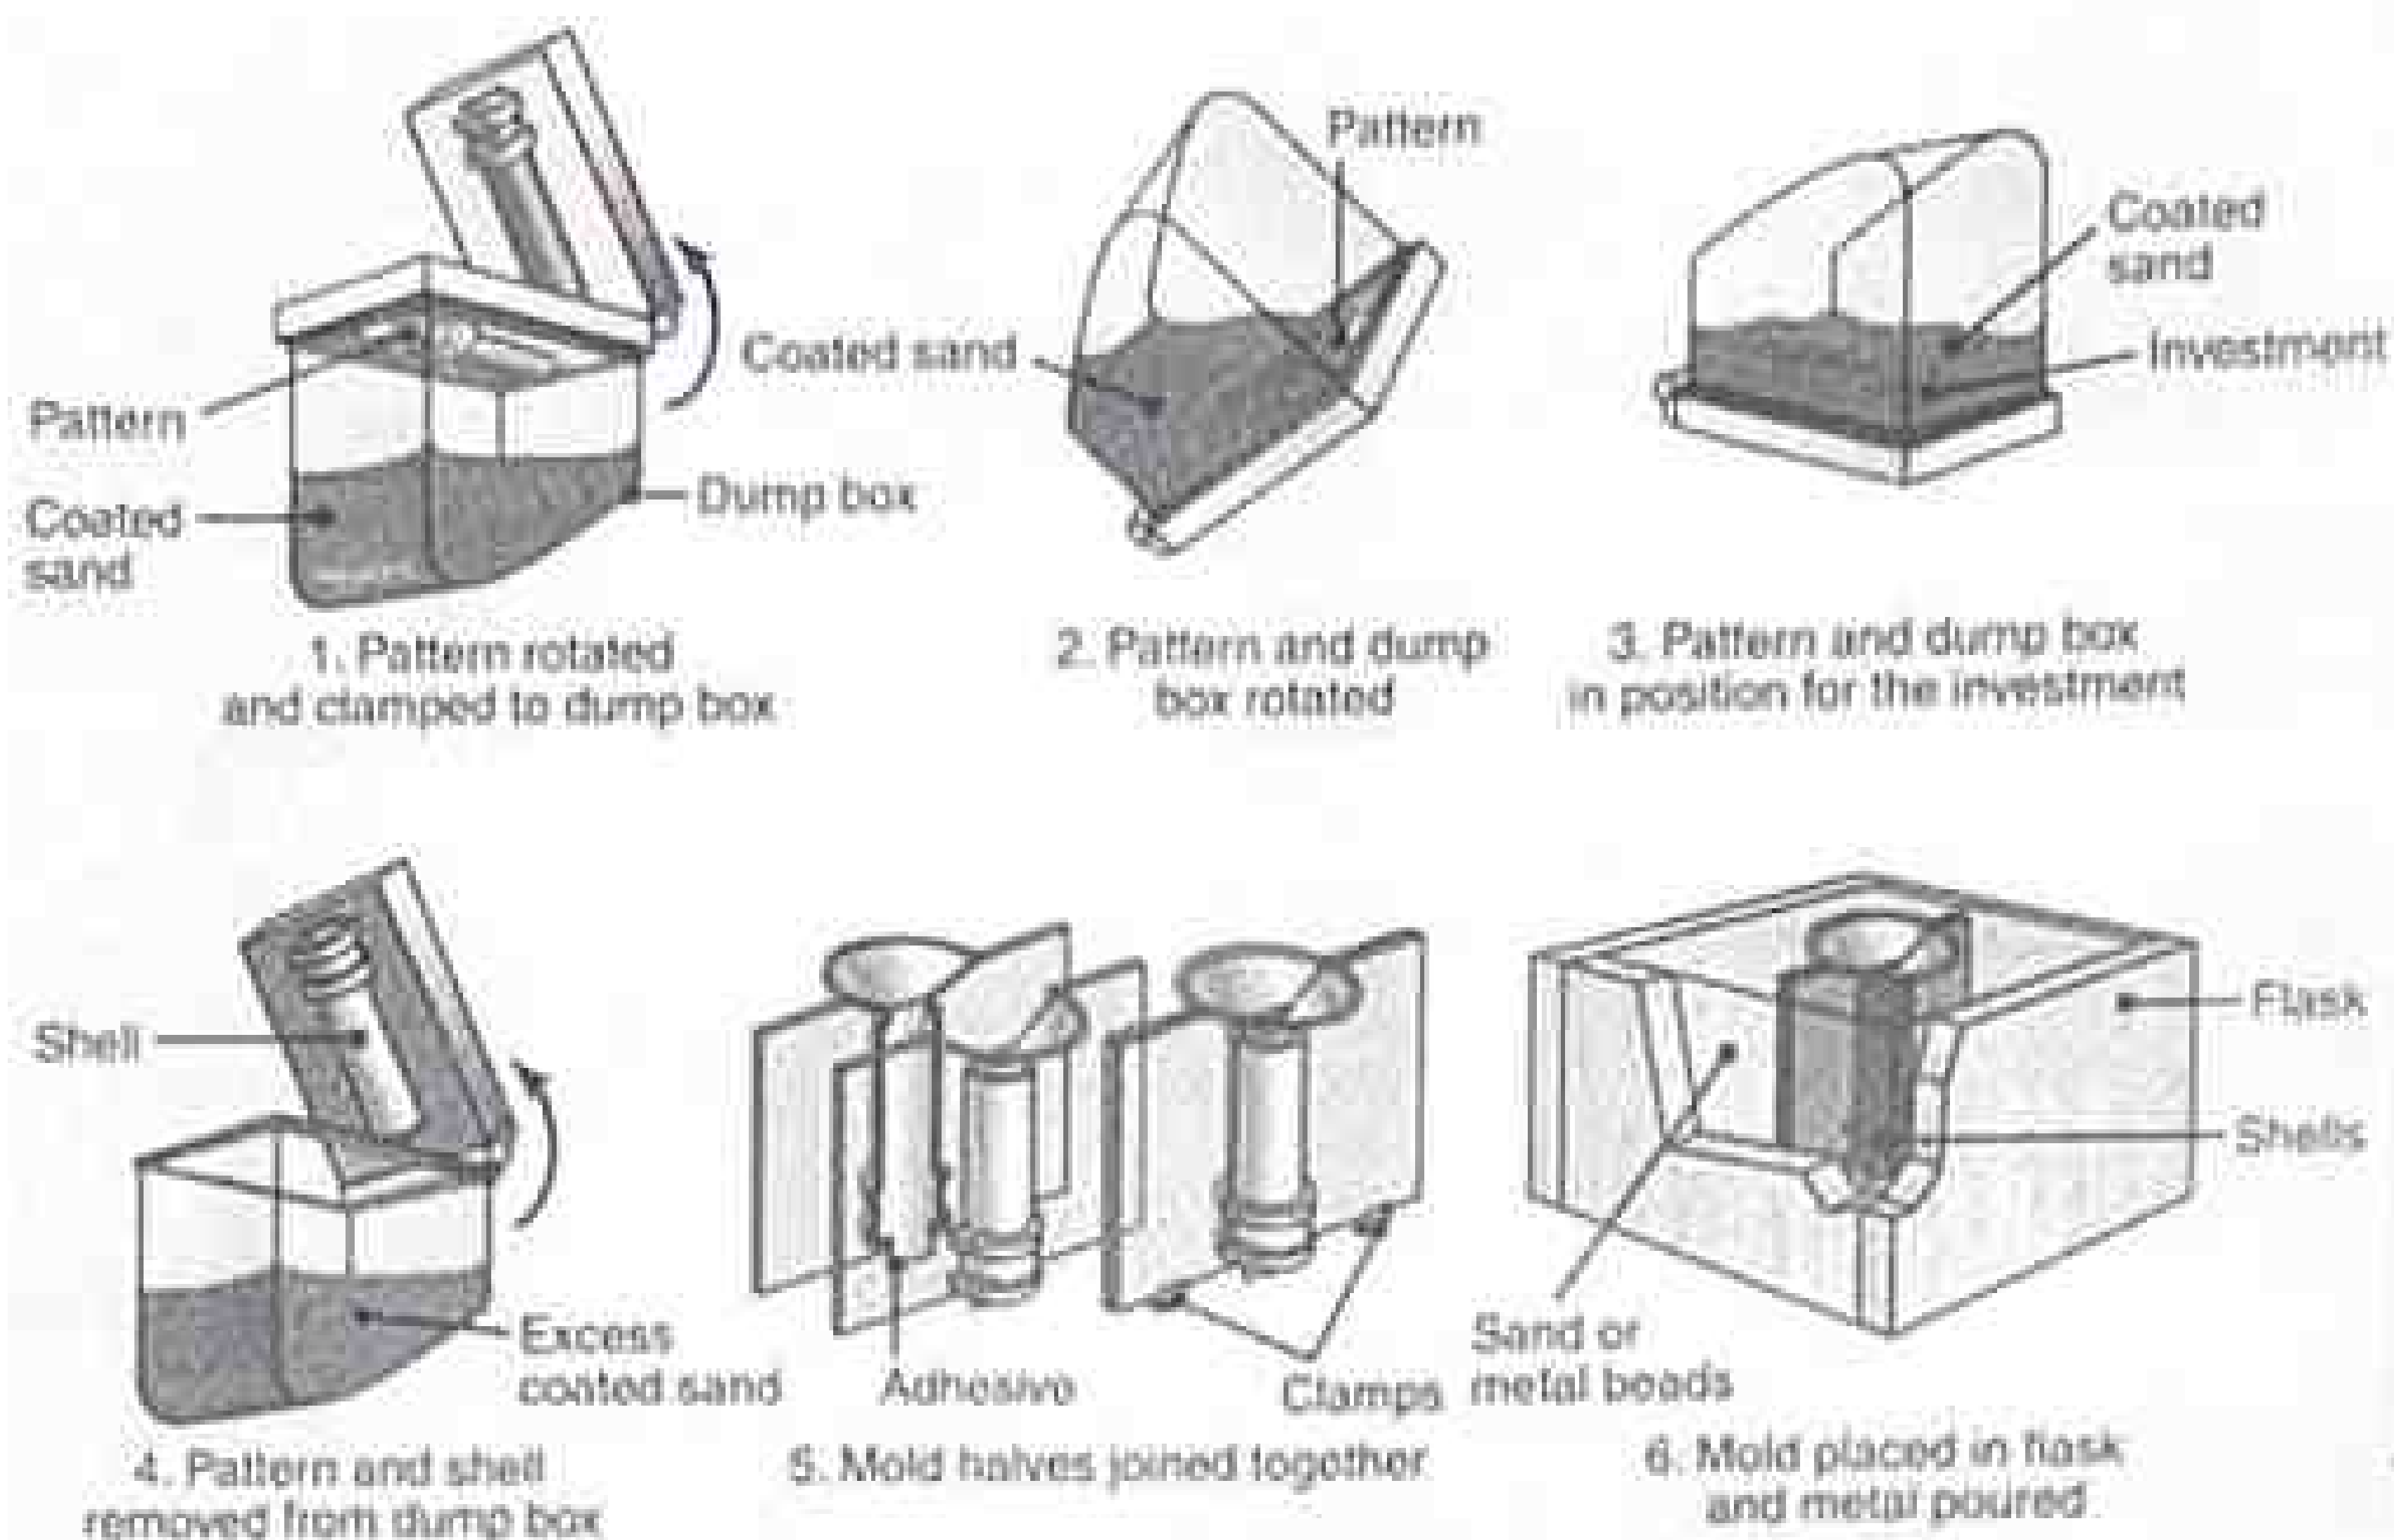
The shell-molding process, also called the dump-box technique
